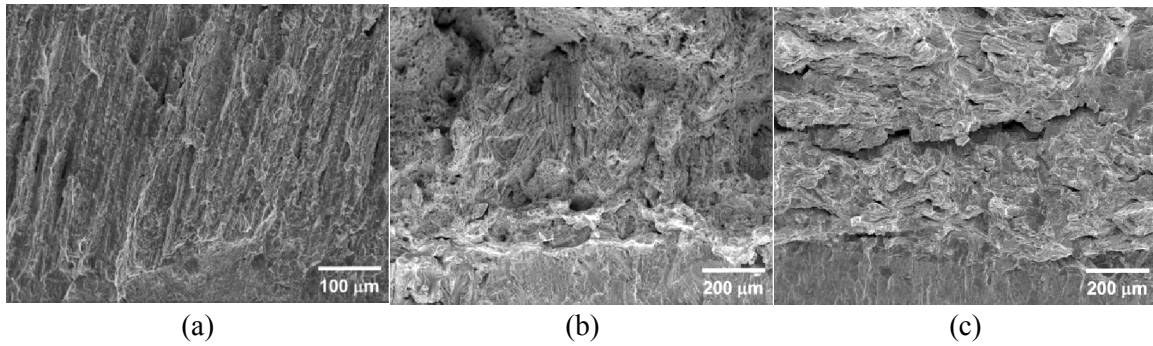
Fracture surface of hydrogen precharged 3PB of (a) 304L/308L FZ-7, (b) 21-6-9/308L HAZ-17, (c) 304L/308L HAZ-18. End of precrack can be observed in bottom of image and crack growth direction is from bottom to top.
